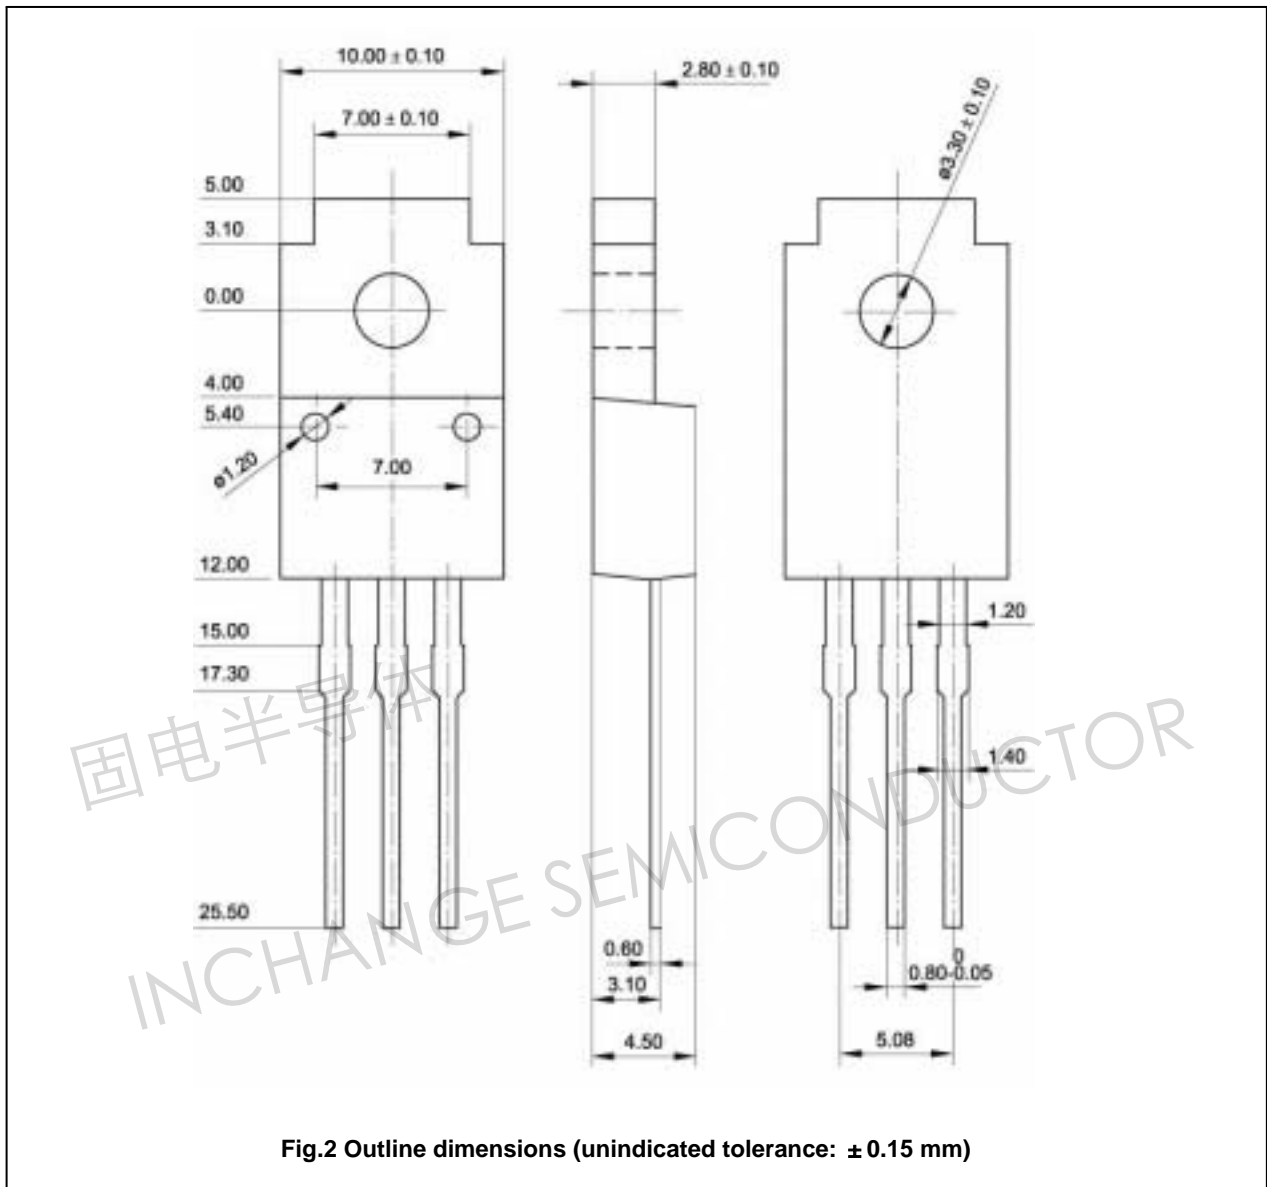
Outline dimensions (unindicated tolerance:  $\pm 0.15$  mm)
